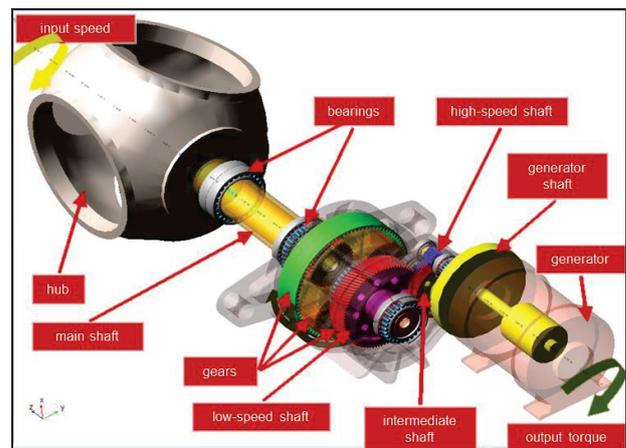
Multi-body system of the wind turbine gearbox. The gearbox increases the rotation speed to get a sufficiently high rotation speed and torque for the generator.
